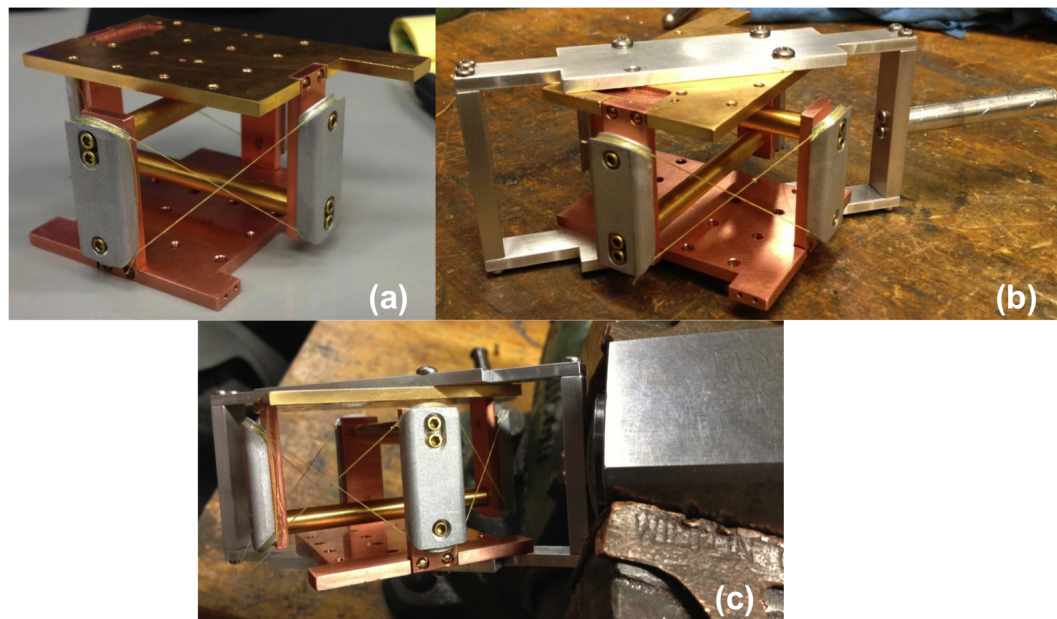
(a) The completed cooling platform, (b) the platform held in place by the Aluminum tensioning bracket, and (c) the tensioning of the Kevlar during stage assembly.
